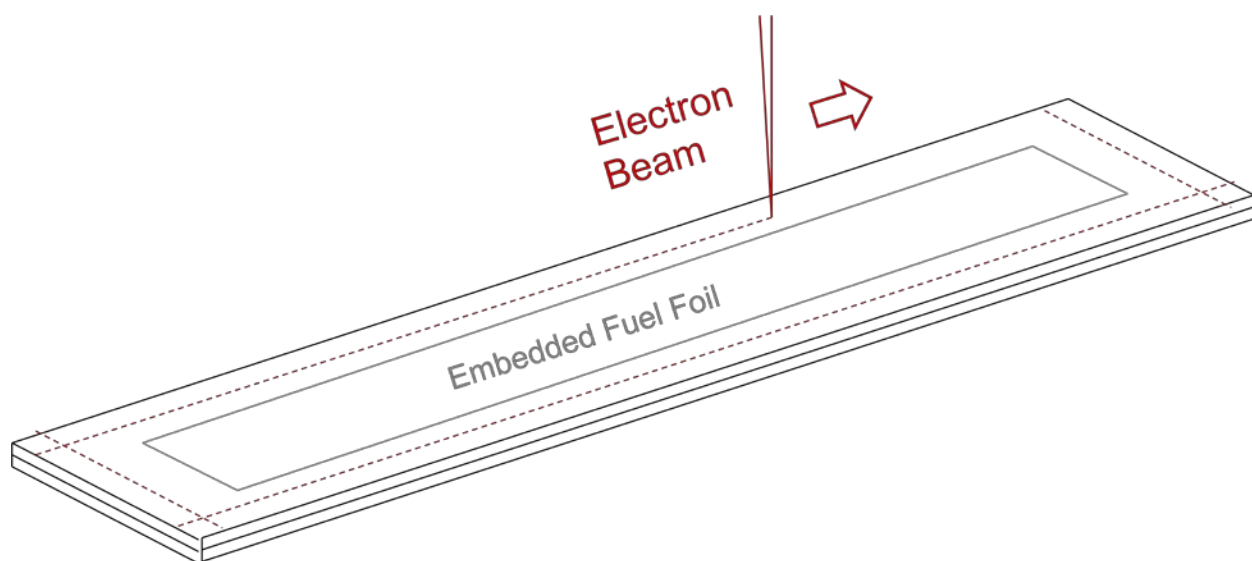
Schematic showing 4 intersecting electron beam lap welds made on aluminum plate along outer perimeter of fuel foil assembly. The LEU fuel foil sits within a pocket machined in one of the aluminum plates.
